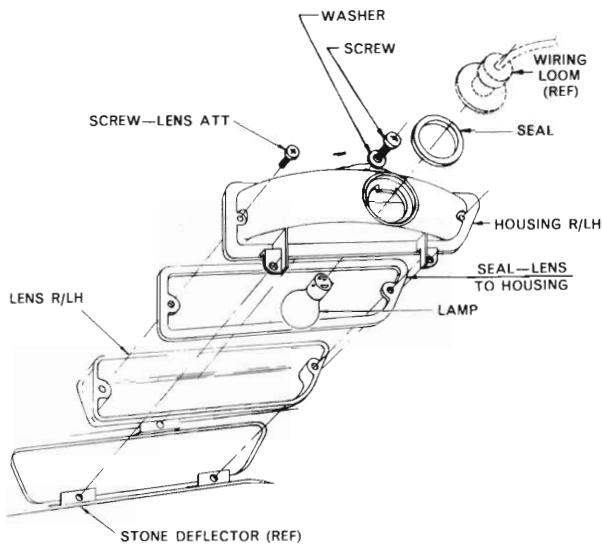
Chrysler front park and turn signal lamp (disassembled view)
